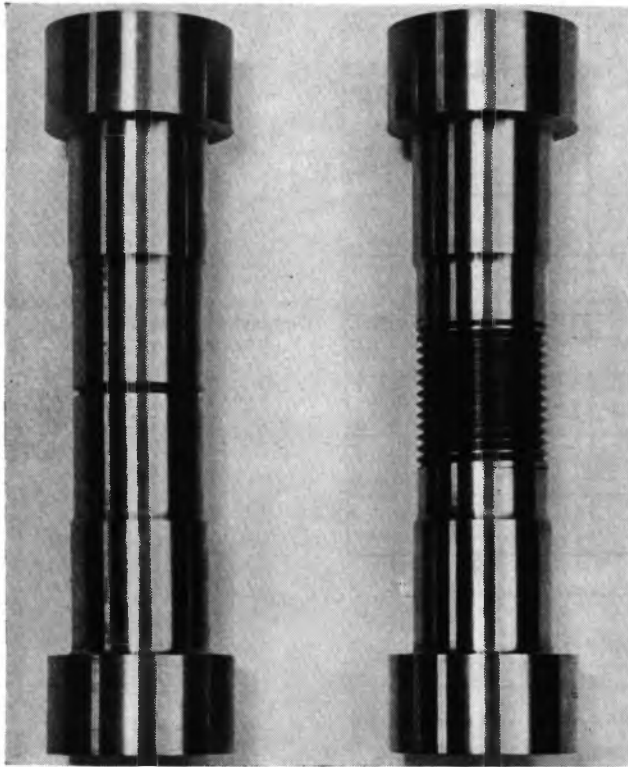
TEST SPECIMENS FOR SHOWING WHERE INITIAL YIELDING WILL OCCUR
